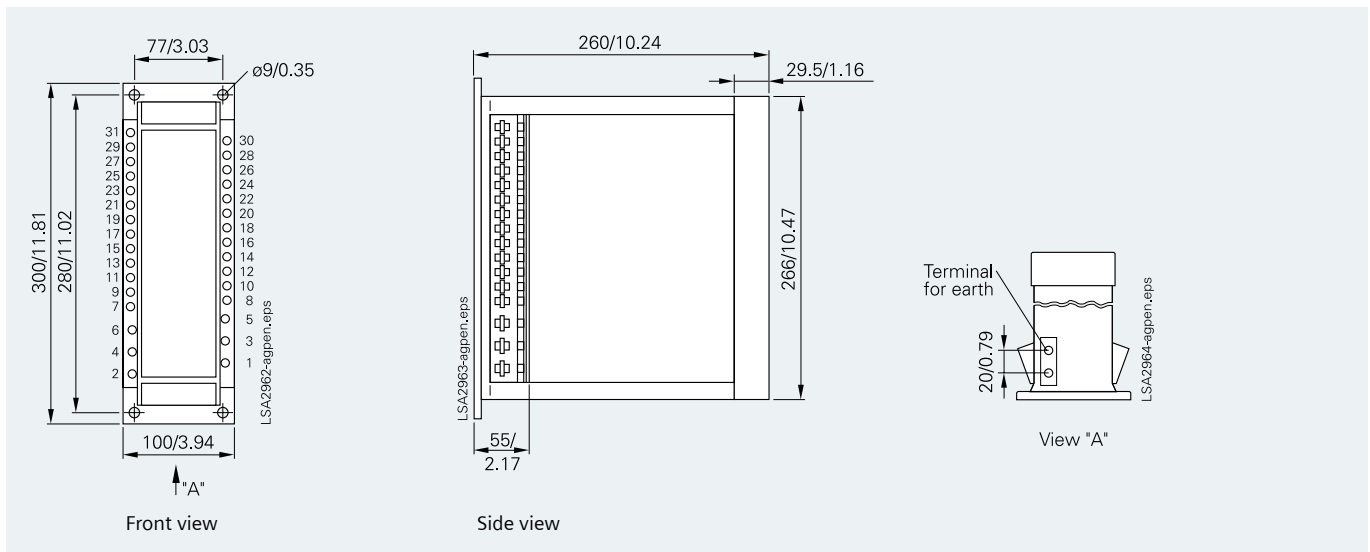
/17 Housing for panel surface mounting, terminals on the side (1/2 x 19")
